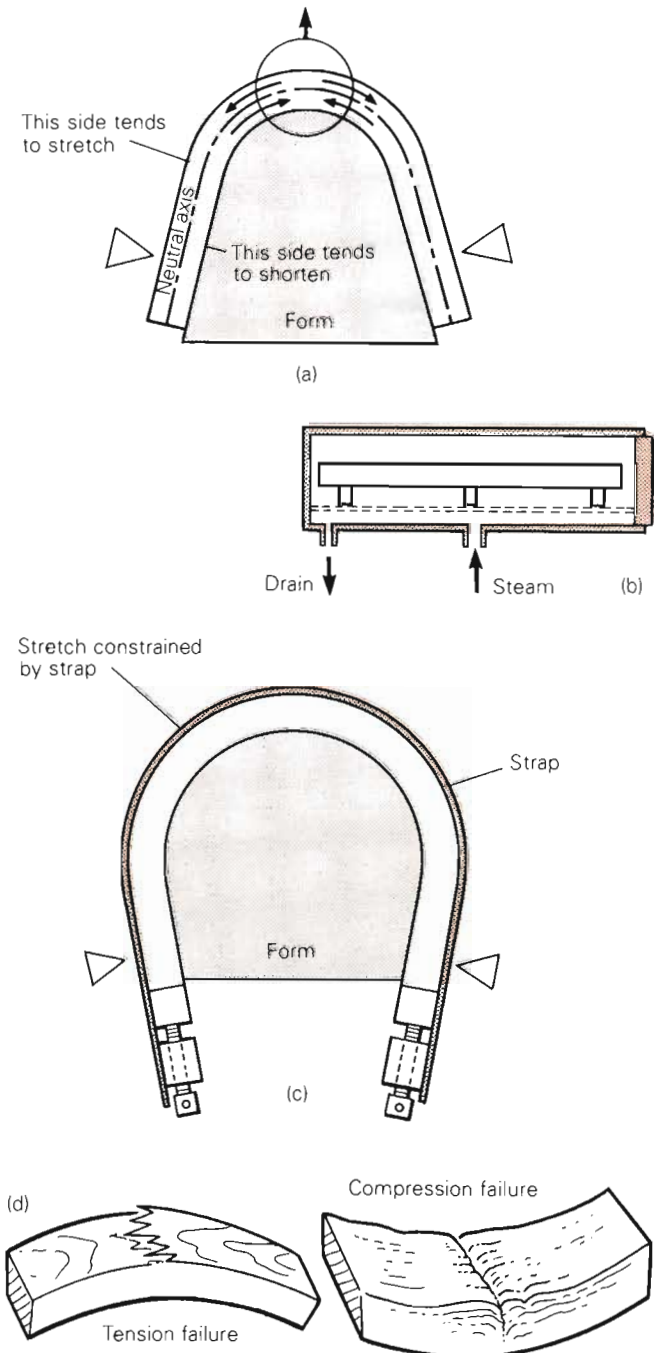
Method of bending solid wood: (a) applying steam under pressure, (b) bending on a former, (c) using a strap, (d) types of failure.
